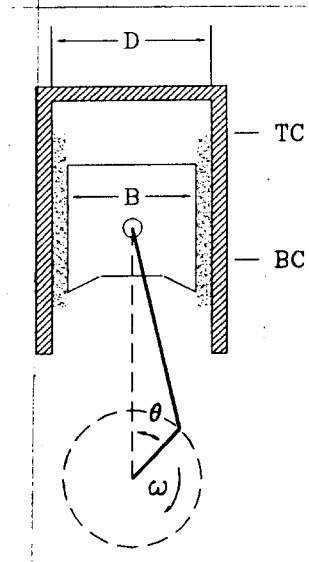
Geometry of cylinder, piston, connecting rod and crankshaft.
